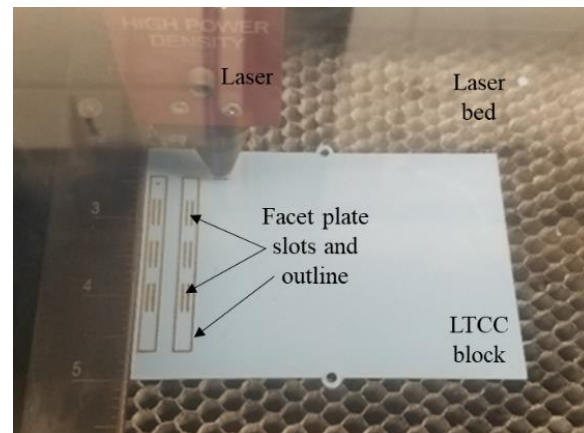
Photograph of LTCC facet plate structure during milling of the slits and formation of the facet plates. An LTCC block is placed on the bed; then the laser cuts the facet plate slots and outlines the plates.
